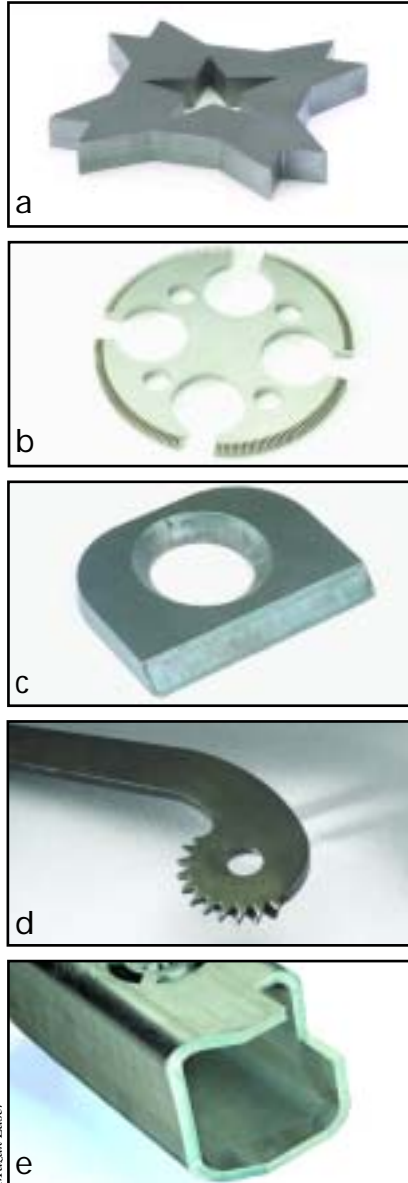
Lasers can cut 2-D parts, such as (a) 0.375" steel part with 36° and 48° angles and (b) ¼"-thick stainless steel precision sprocket; 3-D parts, such as (c) ¼"-thick steel beveled and chamfered part and (d) ¼"-thick steel part with laser-hardened and chamfered teeth; and rotary parts, such as (e) 3" steel tube with ¼" wall thickness.
